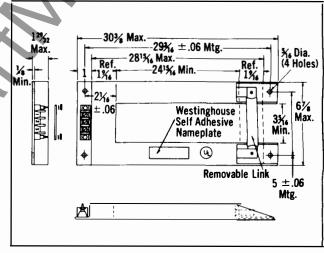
Mounting Dimension for S# 1257C92G01, G02
